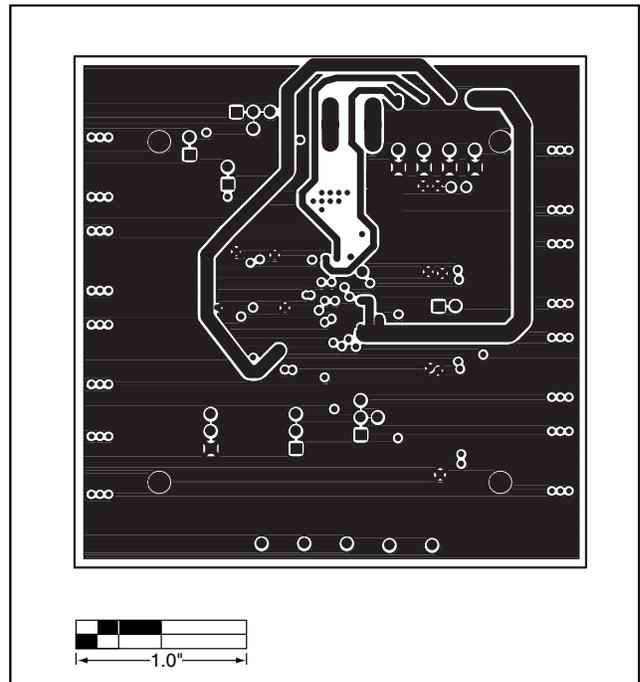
MAX3675/MAX3676 EV Kits PC Board Layout—Power Plane
